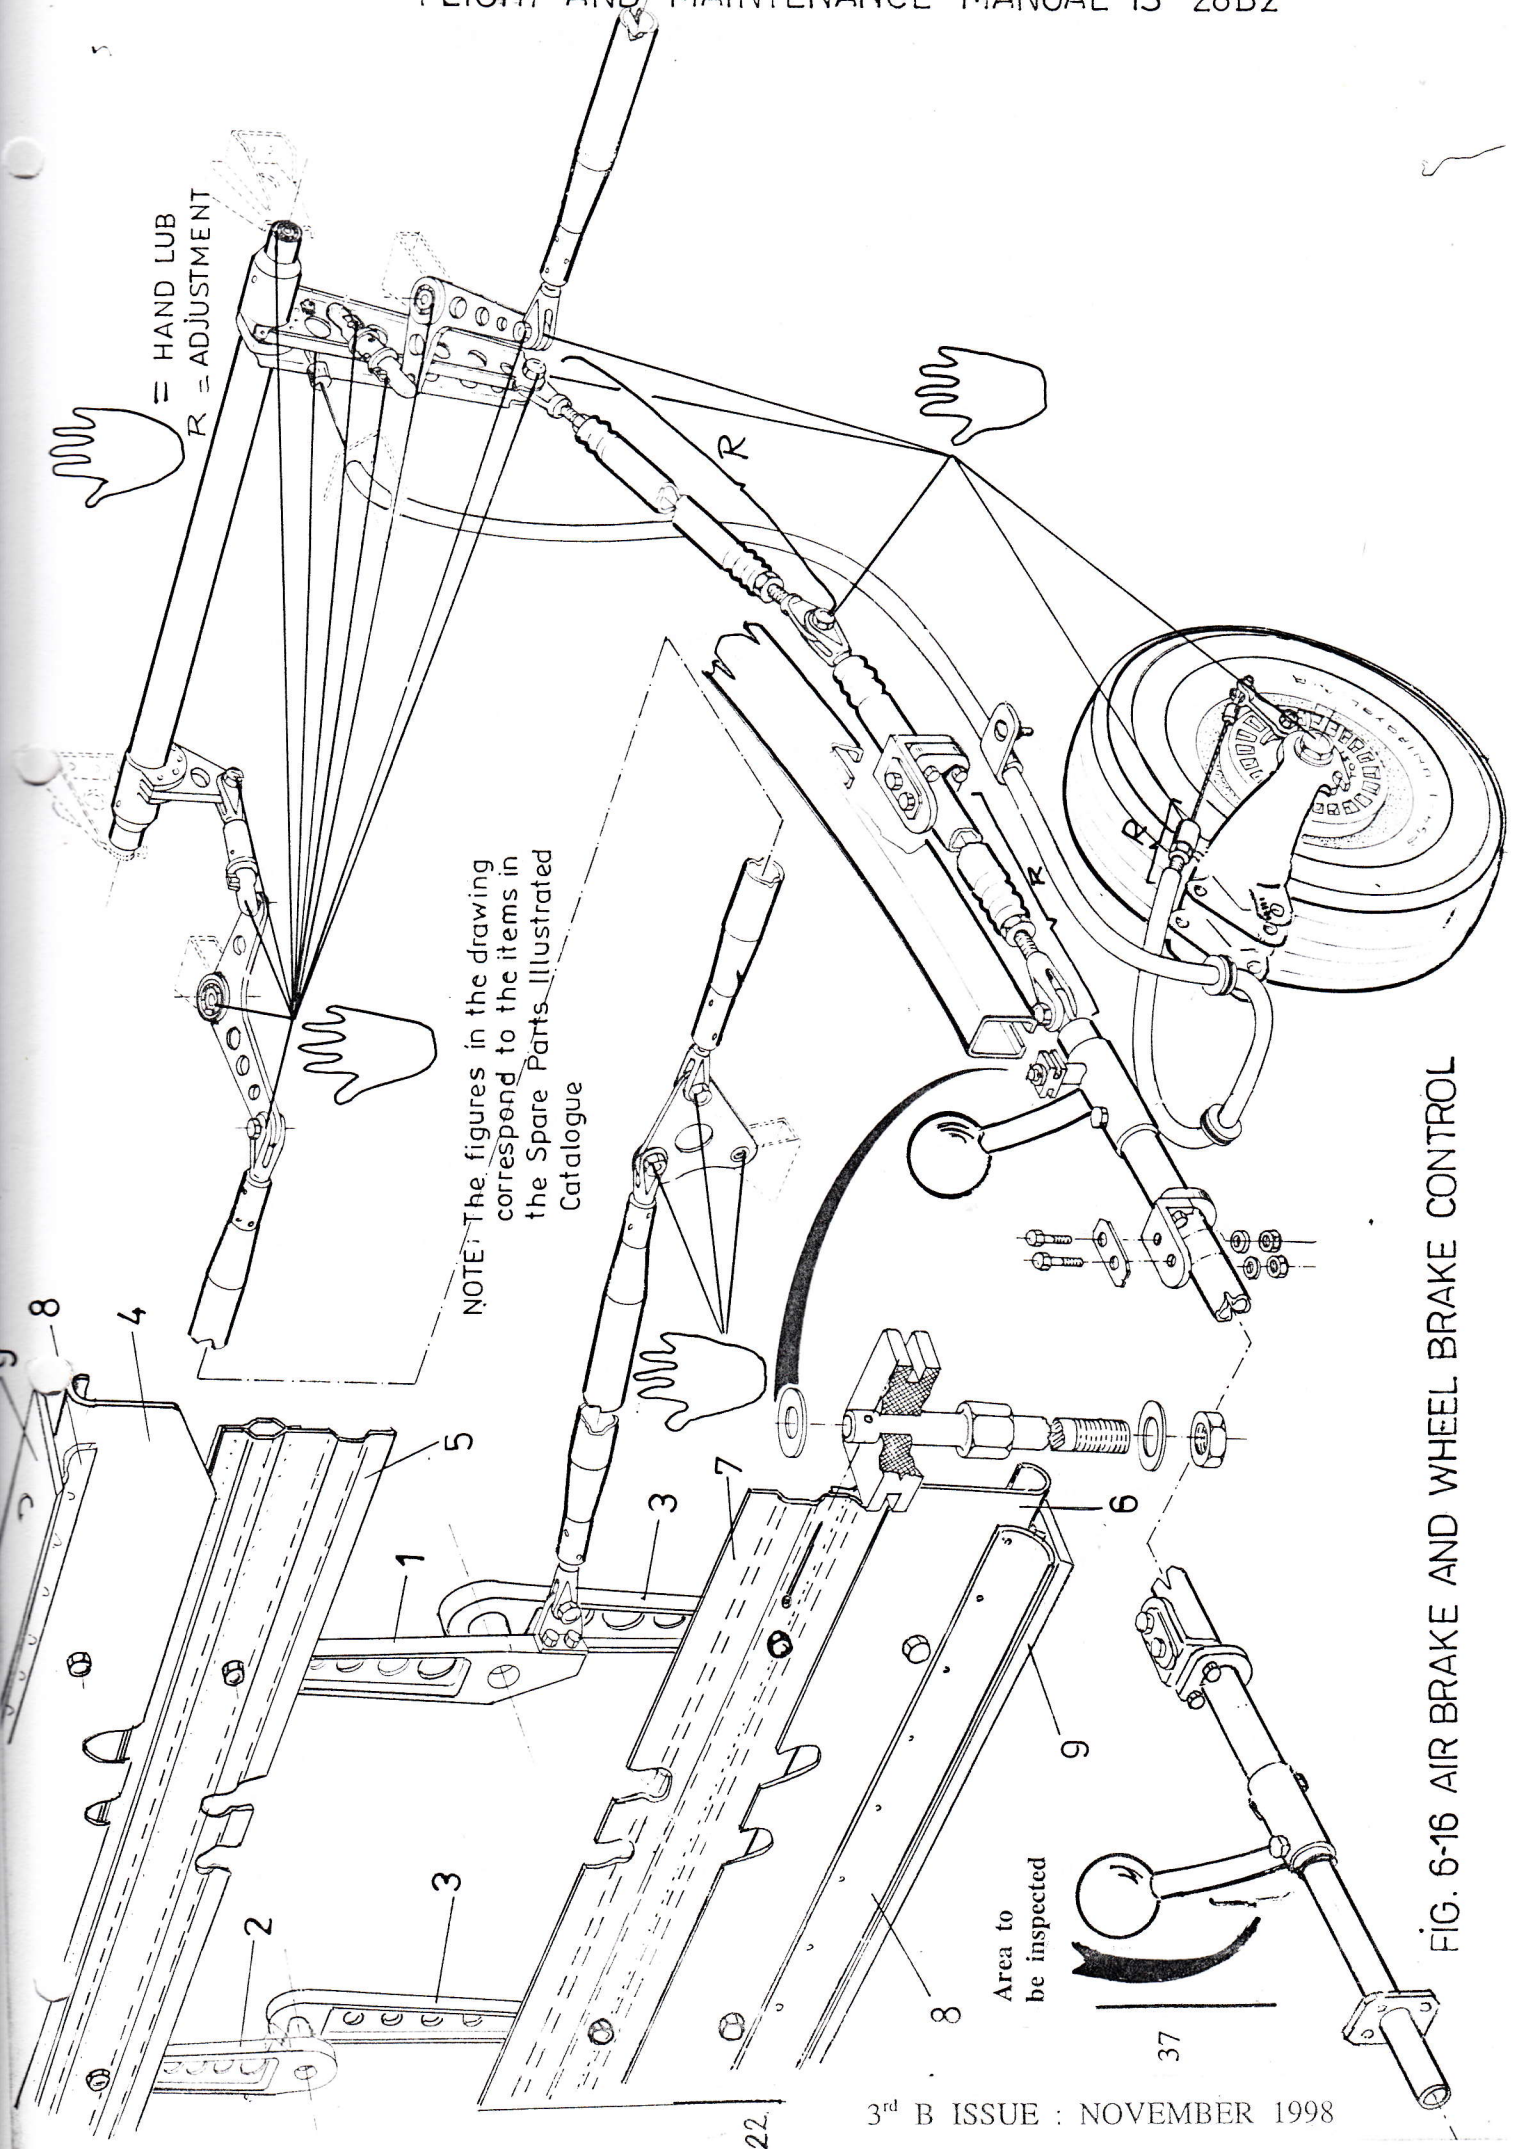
AIR BRAKE AND WHEEL BRAKE CONTROL
